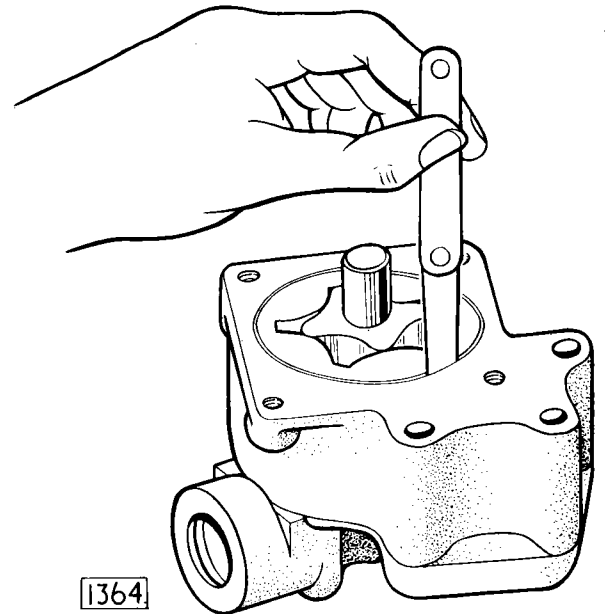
Measuring the clearance between the outer rotor and pump body
